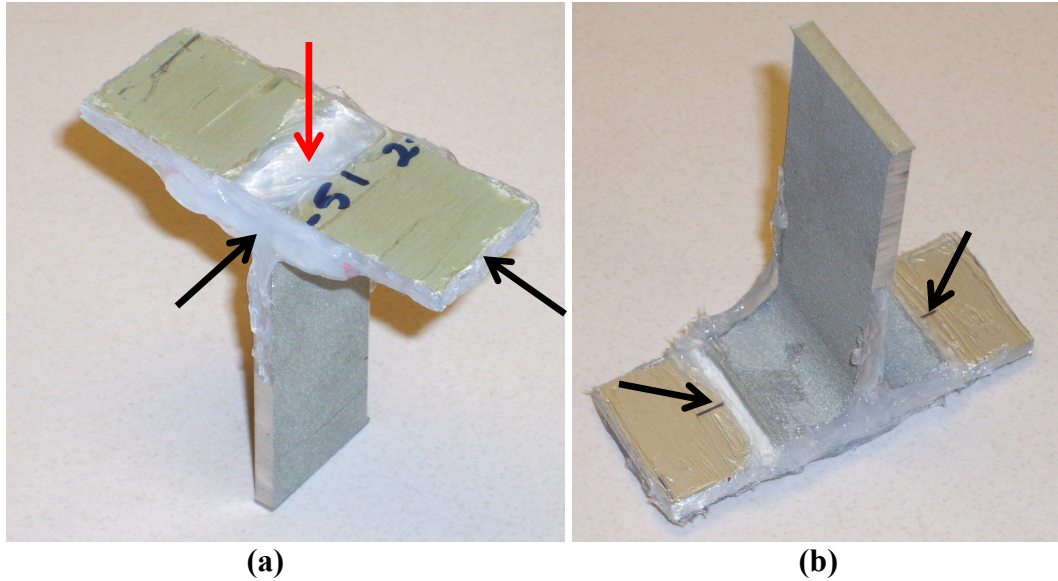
(a) Fatigue test specimen in which exposed aluminum surfaces are masked. Exposed surfaces due to sectioning are denoted by black arrows and the weld scroll surface is denoted by the red arrow. (b) Additional masking of the sealant fillet was applied to two of the masked weld coupons with nylon sealant.
